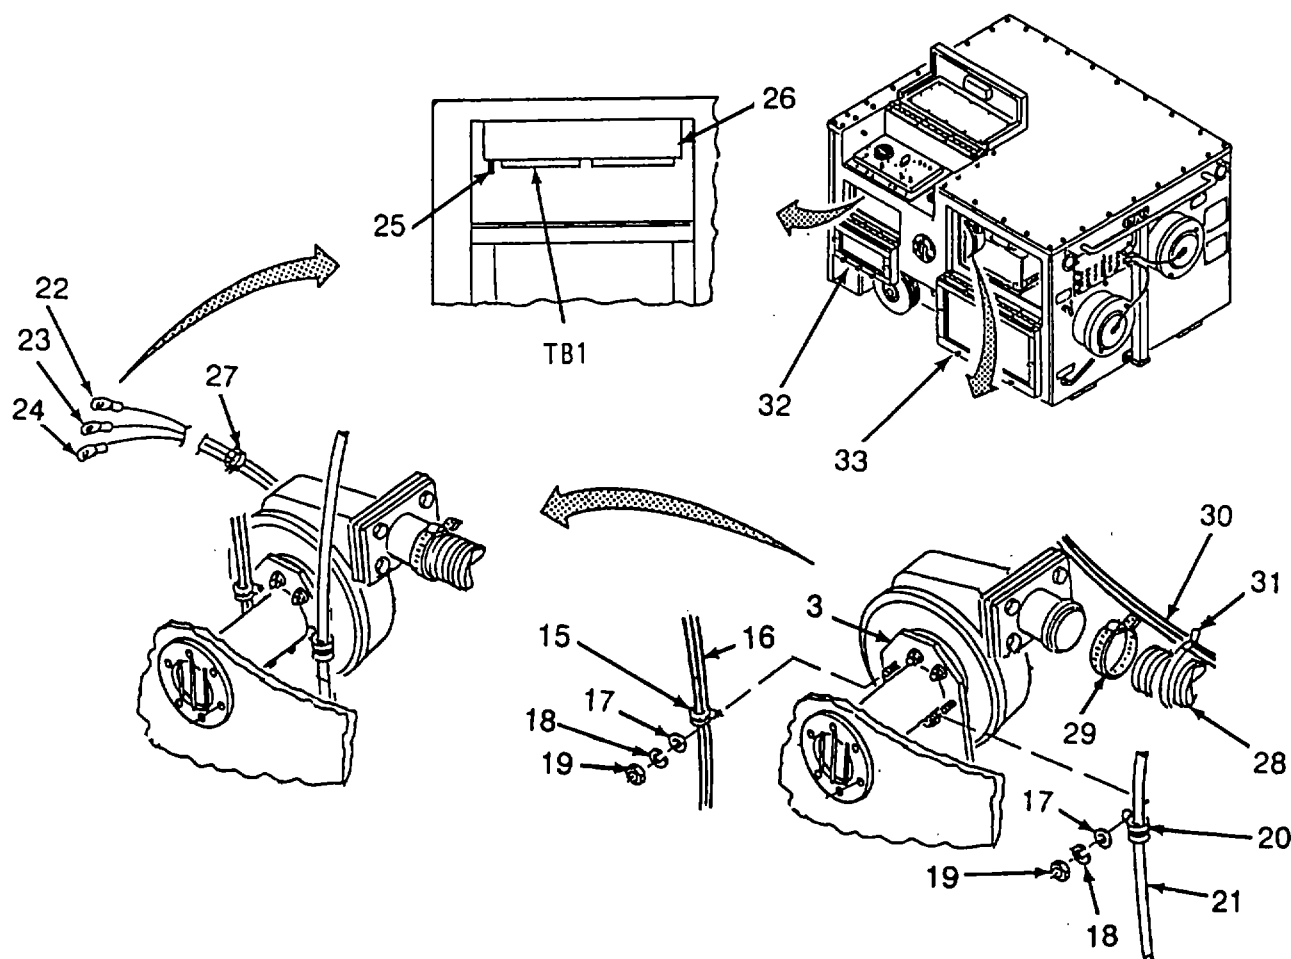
Combustor Fan Assembly Installation (Sheet 1 of 2)
